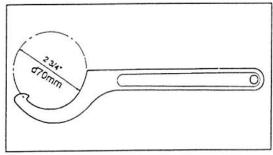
Tighten the bearing by turning the axle nut clockwise with a 2 3/4" hook spanner until the right clearance is achieved.
